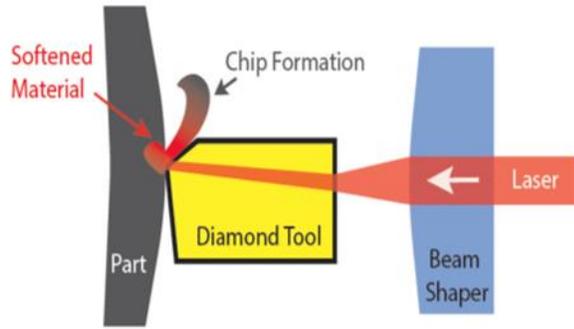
The delivery of laser emission at the cutting edge of the diamond tool
